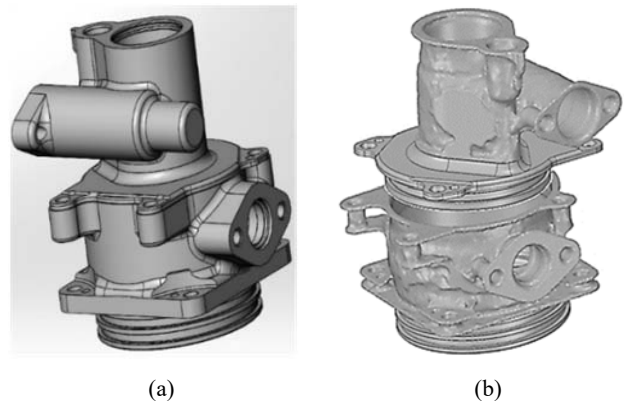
Original (a) and optimized (b) models of aircraft gearbox
